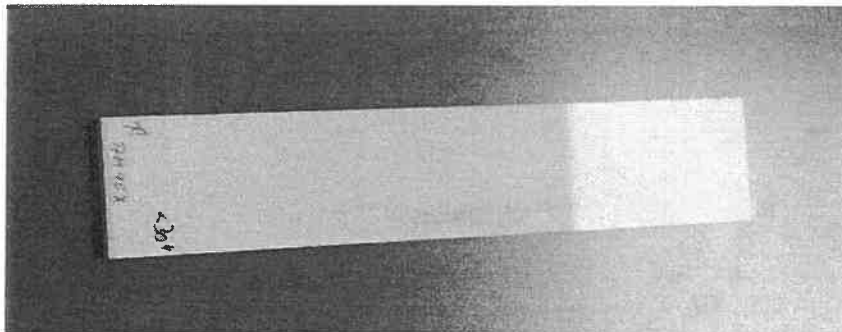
Example of cracked specimen (removed from the former), test fluid isopropanol containing 0,1% methylene blue.
